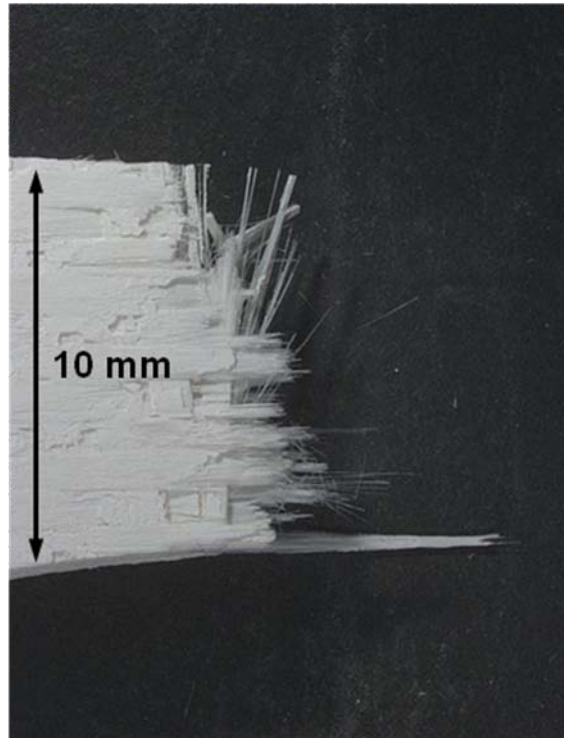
Fracture surface of the N720/AM specimen tested in creep at 131 MPa in steam at 1100°C.
